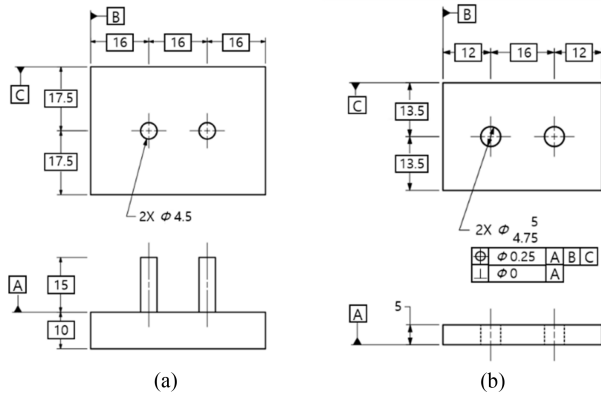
Part drawings of the base problem, showing size and position tolerances for holes: (a) Part A and (b) Part B. All numbers in [mm]
